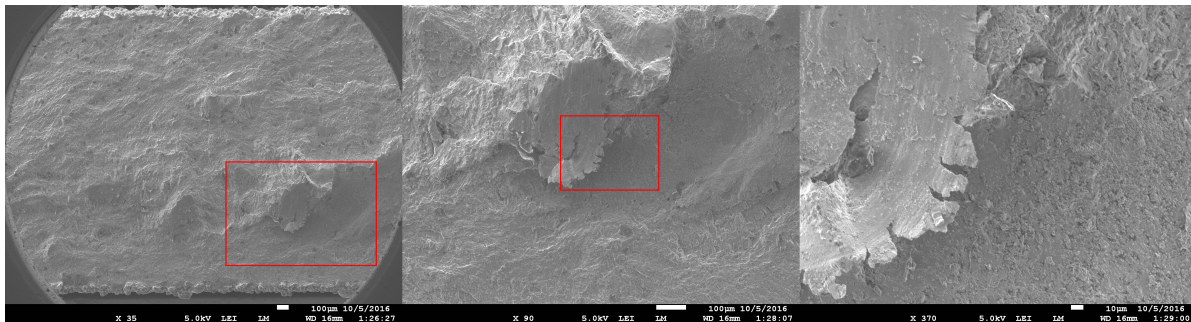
Flattened peaks at fracture surface - Specimen_90_8
